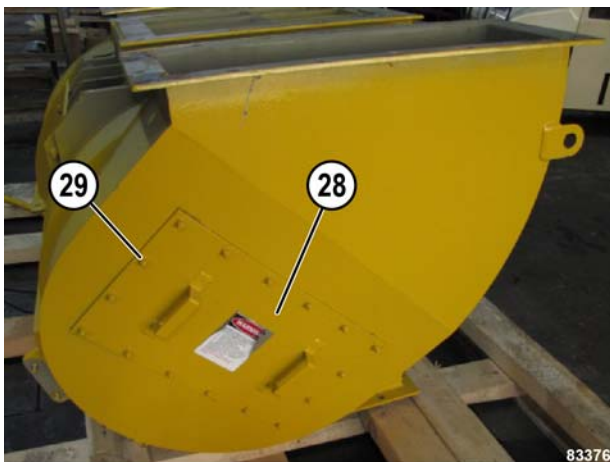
INSTALLING THE INLET BOX COVERS
